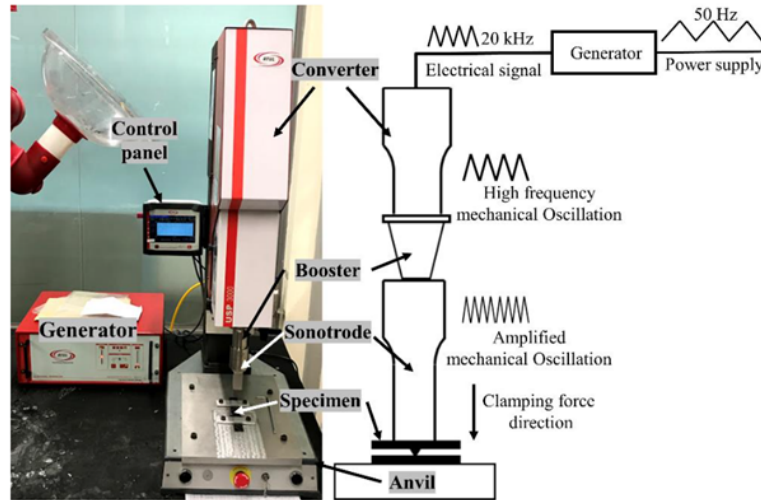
Left: An ultrasonic welder. Right: A schematic representation of an ultrasonic welder [7].
